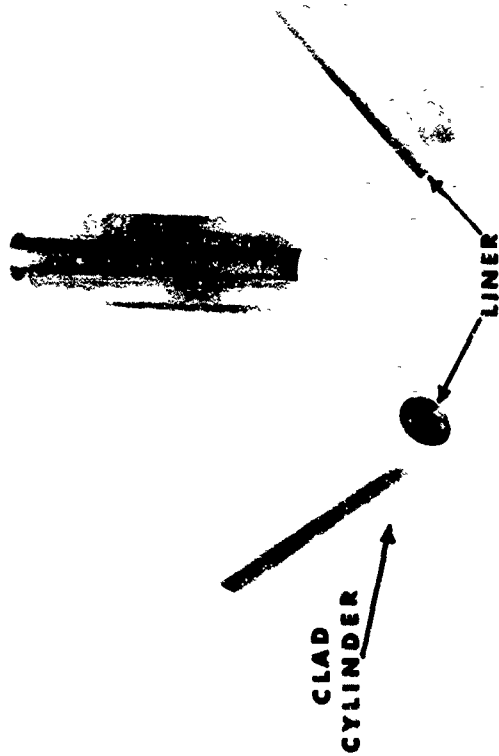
Hollow Steel Cylinders With Interiors Explosively Clad
